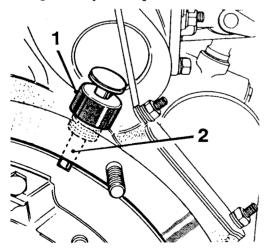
Timing pin LST 107 fitted to flywheel housing 1. LST 107 body 2. LST 107 pin To use LST 107, locate the body of the tool in the hole in the flywheel housing and turn the engine over until the tool pin drops into the slot in the flywheel. Check that number one exhaust valve is fully open; if so, the engine is now correctly at the 'E.P' position for timing purposes. If No. 1 exhaust valve is not open, turn the crankshaft one complete revolution and realign the 'EP' position with tool LST 107.
